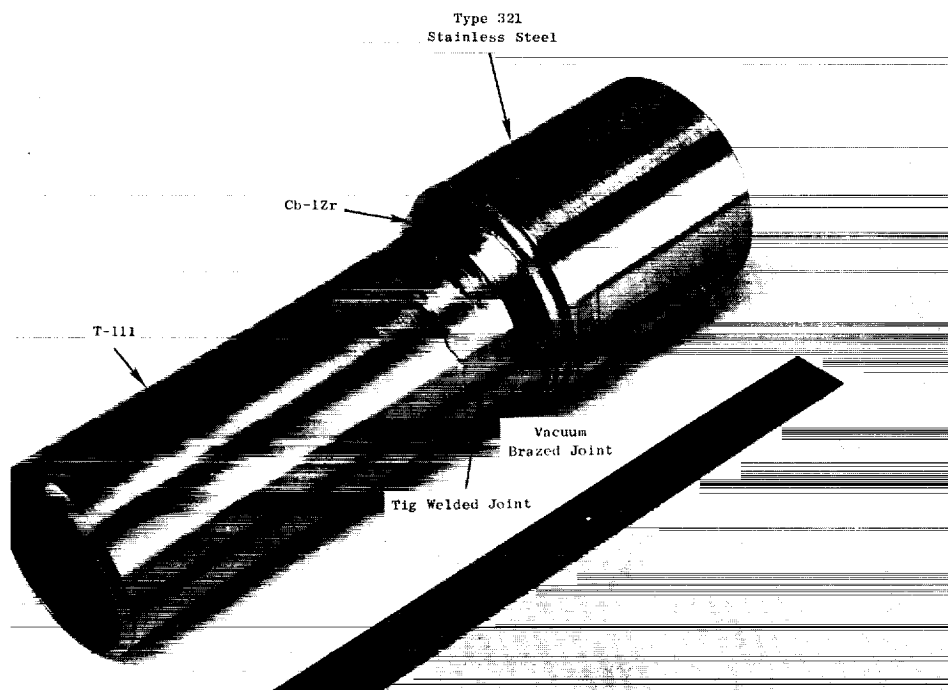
Pump Duct Outlet Pipe Transition (Bi-Metallic) Assembly for Connecting Between the T-111 Duct and the Test Loop Stainless Steel Piping.
